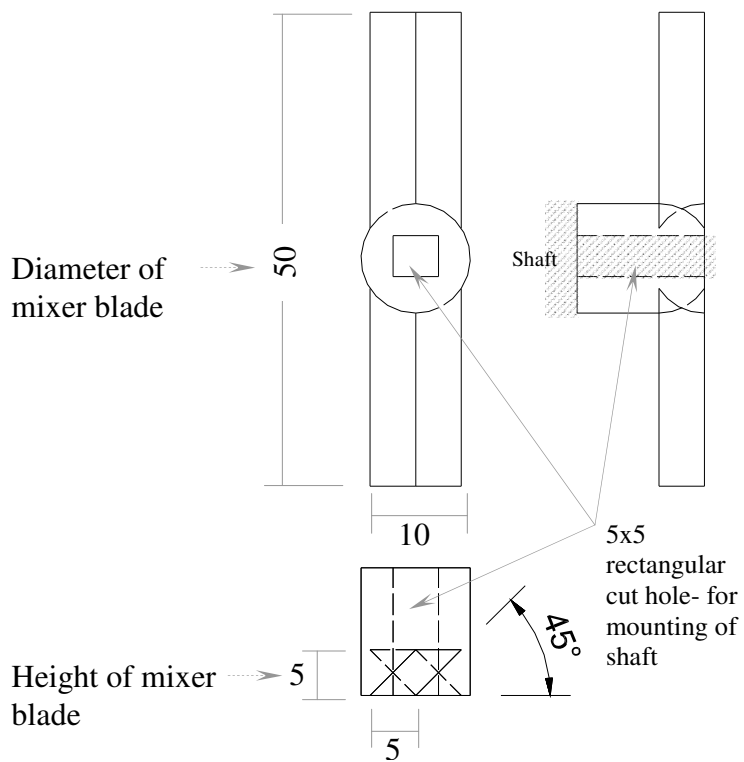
Schematic of 45° blade for DM installer A (all dimensions in mm).
